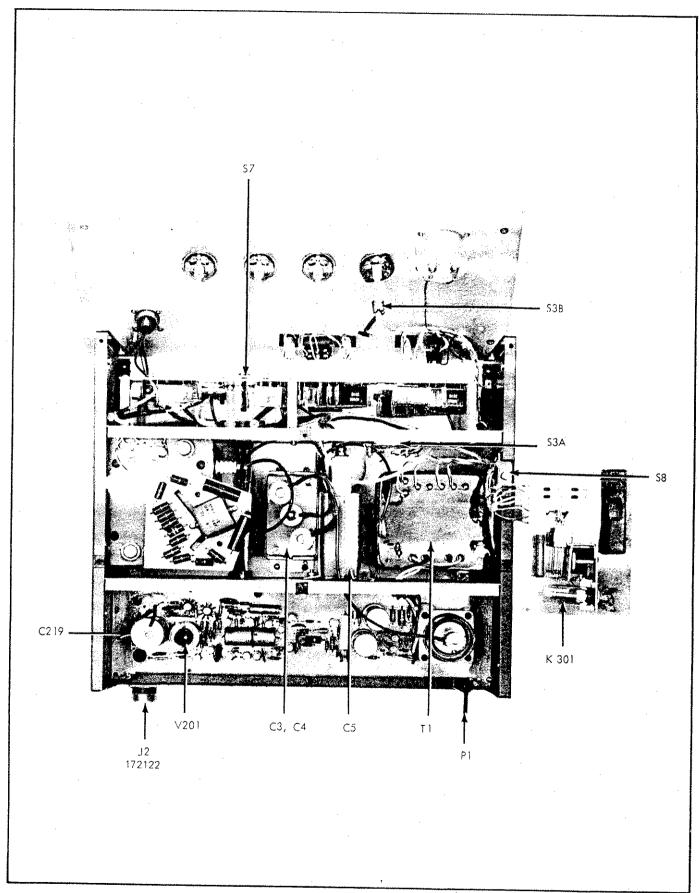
FINAL ASSEMBLY (Sheet 2 of 2)
